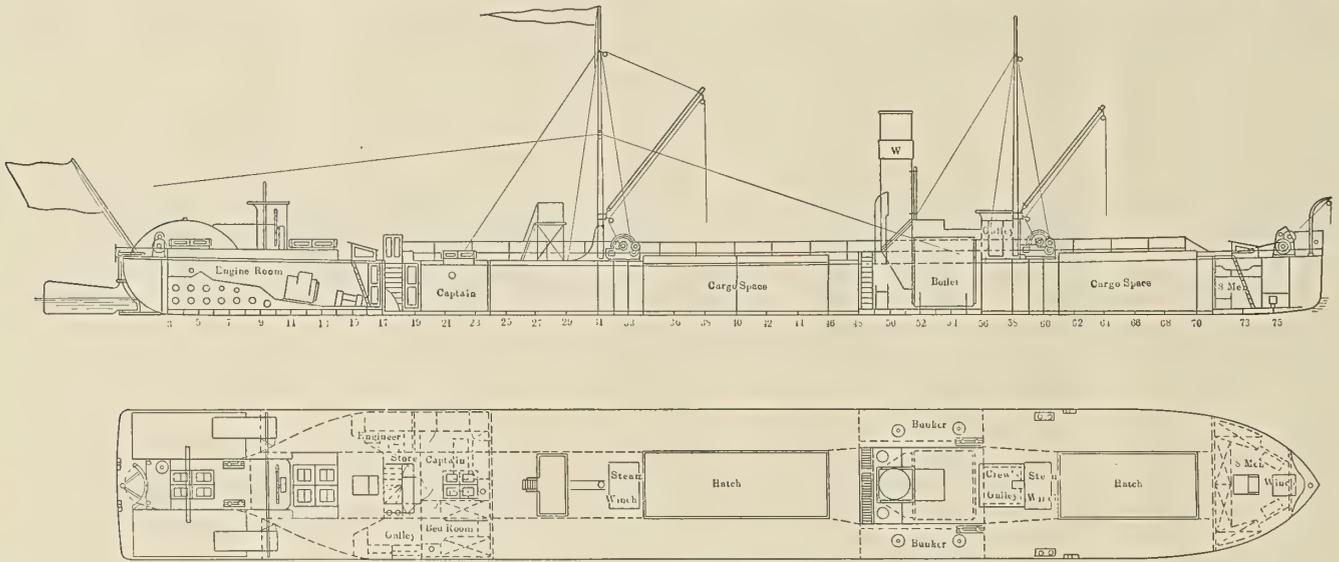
PROFILE AND DECK PLAN OF TYPICAL STERN-WHEEL STEAMER ON GERMAN RIVERS
